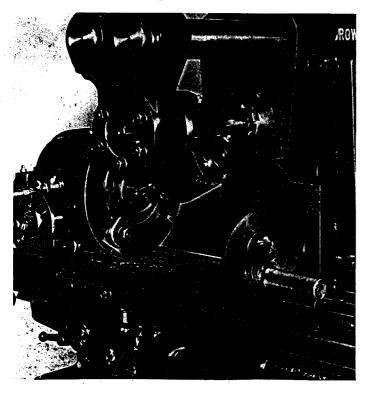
Milling an internal thread, using a No. 0 High Speed Vertical Milling Attachment which is reversed on the overarms to bring the spindle to the desired position. With the table of the Universal machine set at zero, the Attachment spindle is set at the angle of spiral and the cut is taken at the front of the hole. The work is held on a special face plate mounted on the threaded nose of the headstock spindle.
